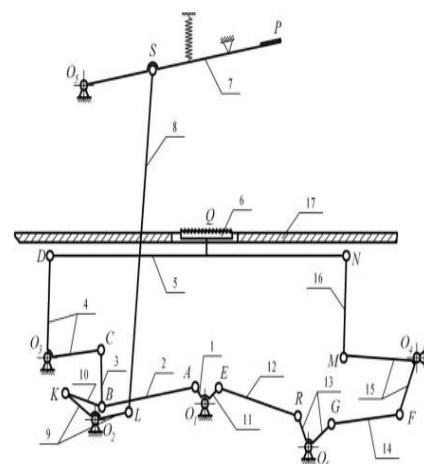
Sewing machine transport mechanism (for high-speed machines)
